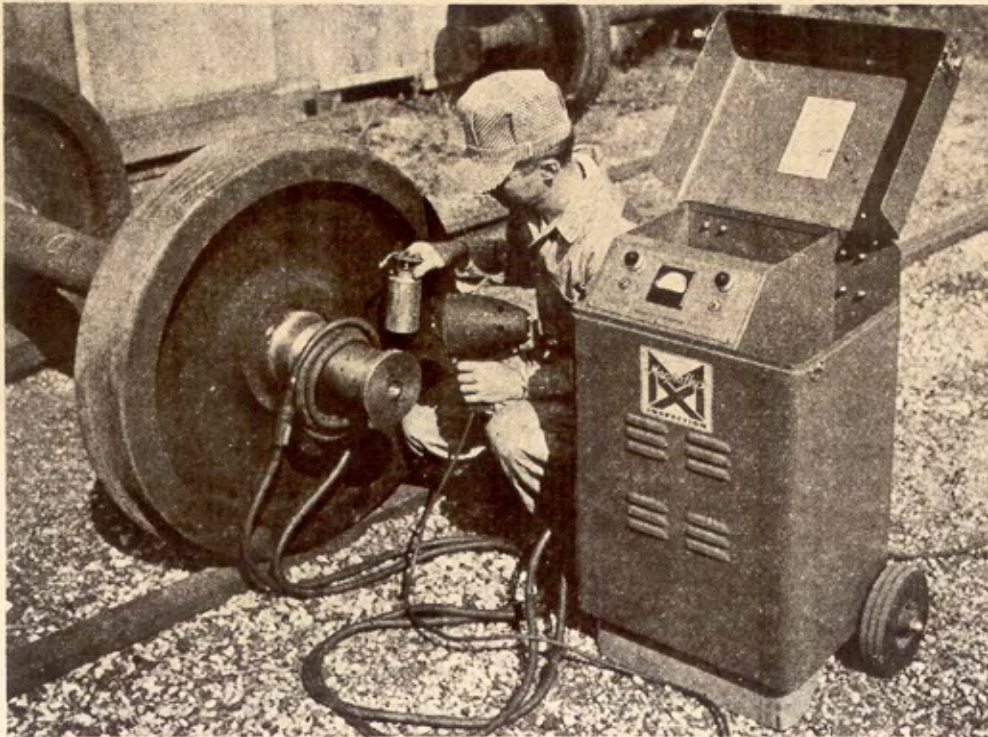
Detection of Service Fatigue Cracks in Railway Car Axle with Magnaflux Portable Wet-Method Magnetic-Particle Equipment. (Courtesy Magnaflux Corp., Chicago, Ill.)
